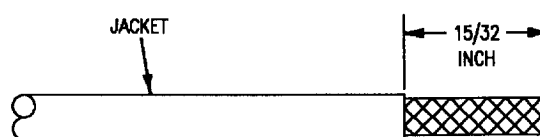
DS07-27-13S1006 Connector (Sheet 2)
